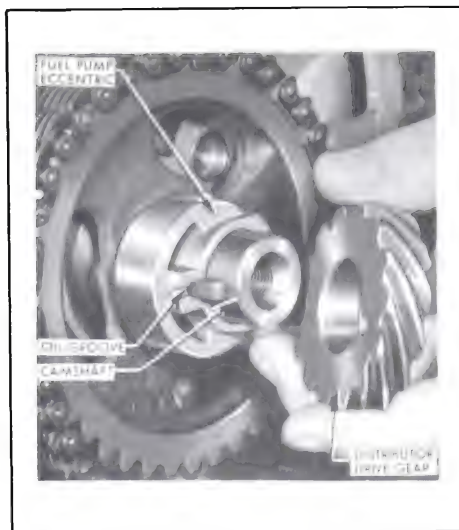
Fuel Pump Eccentric and Distributor Drive Gear Installation
